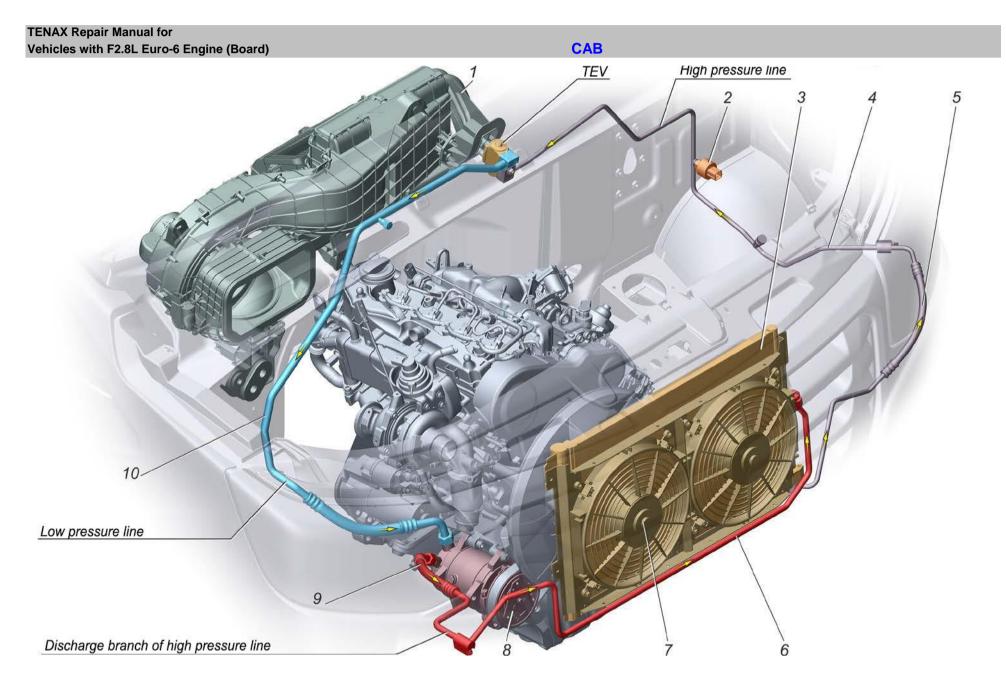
Main components of vehicle air conditioning system: 1 - air handling unit module; 2 - pressure sensor; 3 - condenser; 4 - body pipeline; 5 - condenser outlet pipeline; 6 - condenser inlet pipeline; 7 - fan assemblies with bracket; 8 - compressor; 9 - compressor outlet pipeline; 10 - compressor inlet pipeline
